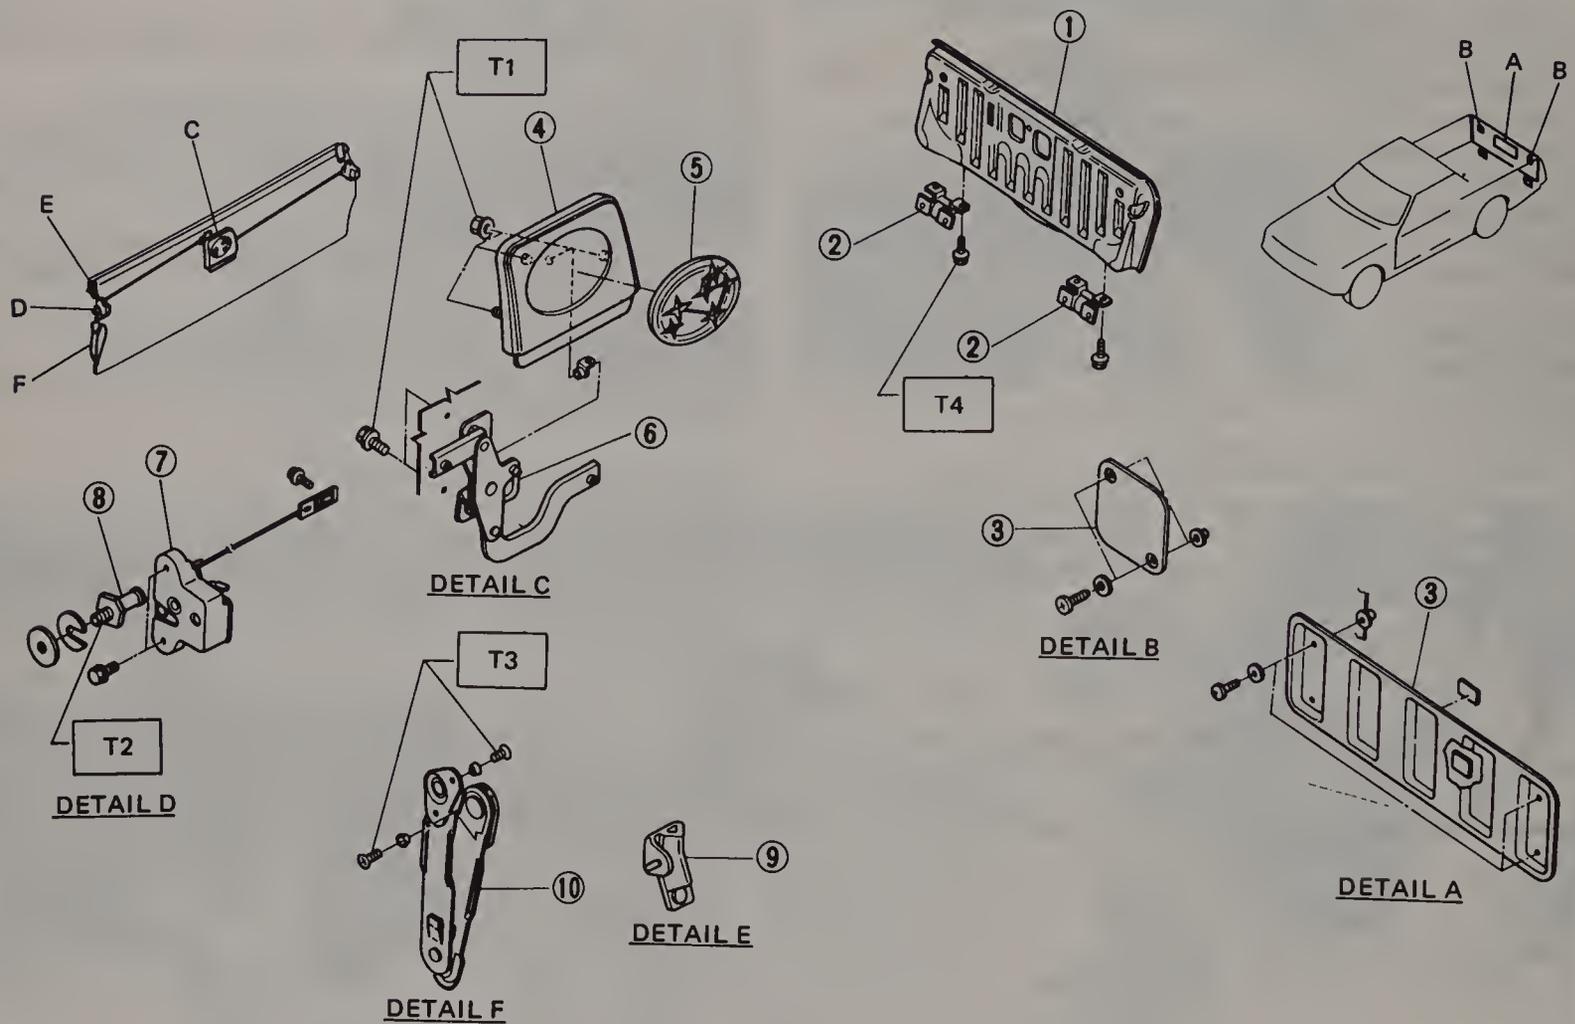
Pick-up truck (1983) rear gate components - exploded view (Sec 15)
